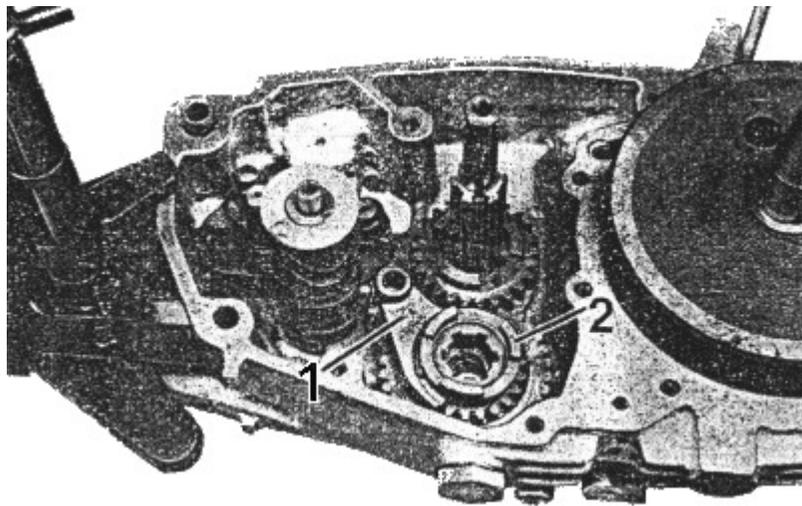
Mounting the gear-shift wheel of 1st/2nd speeds
